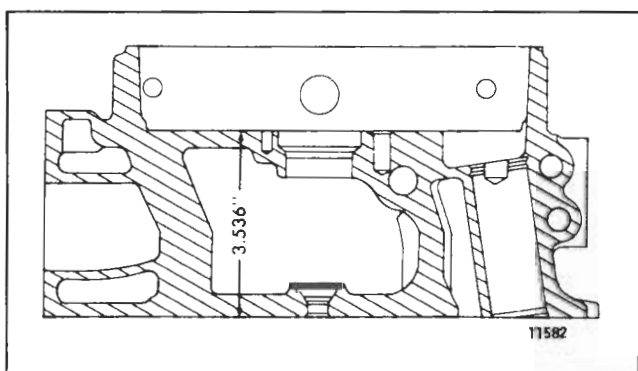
Minimum Distance Between Top and Bottom Faces of Cylinder Head
